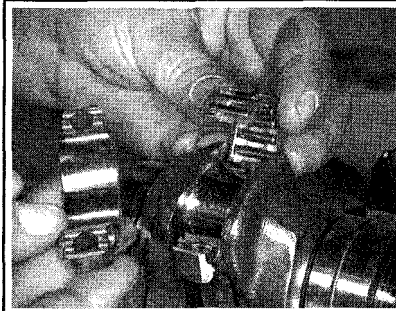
These motors use caged (shown) or loose needle roller bearings
